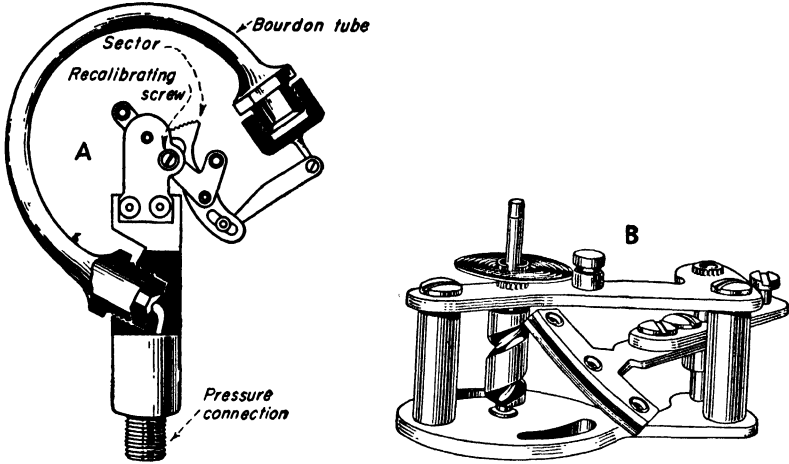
Conventional half-turn bourdon tube for pressure gage. Tube end moves gear sector and pinion or helical shaft. (Courtesy of J. P. Marsh Corp. and American Chain & Cable Co.)
